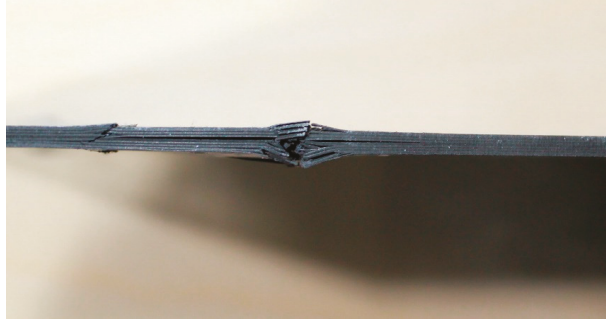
Illustrative kink zone and fracture, specimen P2-S10.
